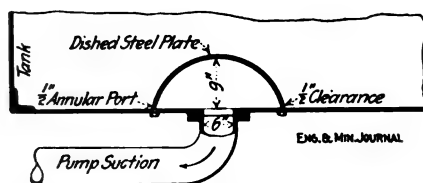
METHOD OF ATTACHING PUMP SUCTION TO BOTTOM OF A TANK.
